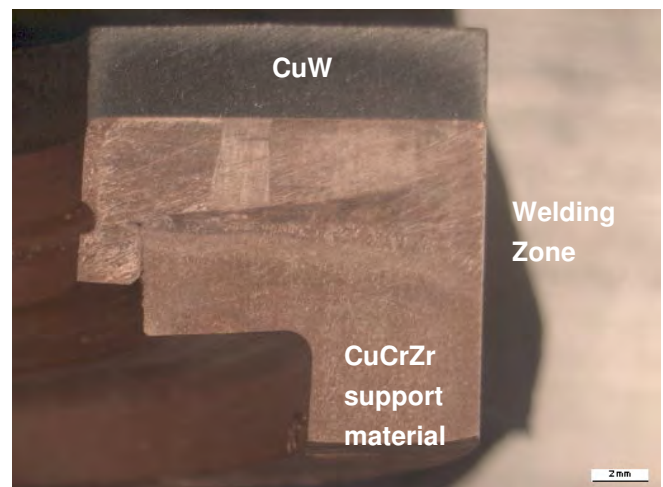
Cross section of the welded joint area of an electron beam welded tulip blank
